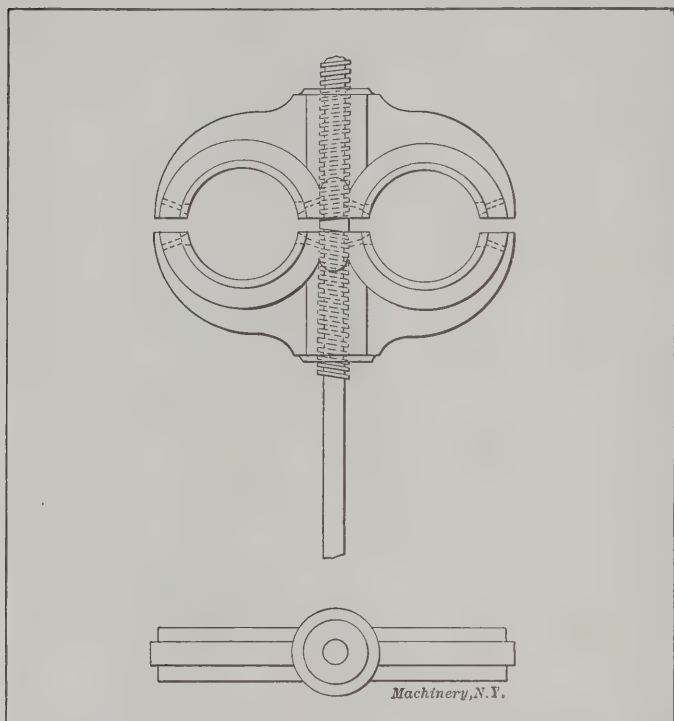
Friction Collars of Screw Feed Wheel, Whitworth Drilling Machine
